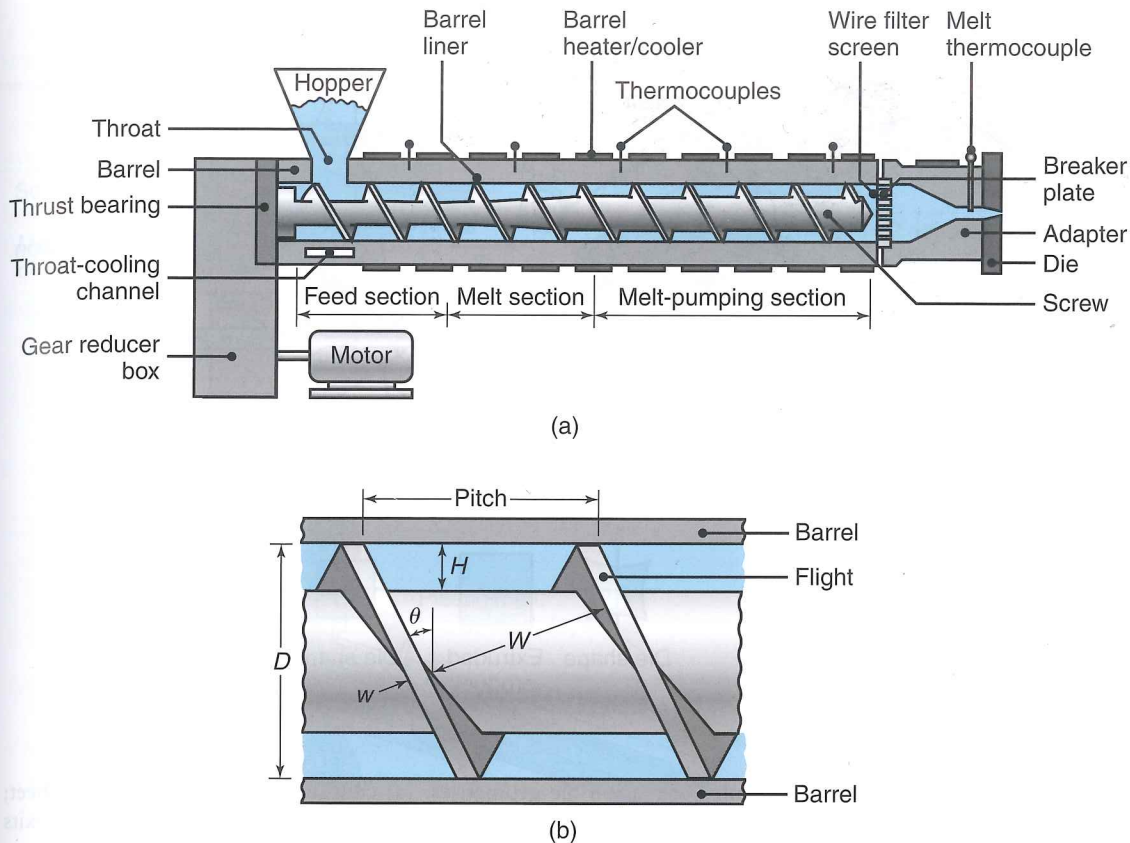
(a) Schematic illustration of a typical screw extruder. (b) Geometry of an extruder screw. Complex shapes can be extruded with relatively simple and inexpensive dies.
